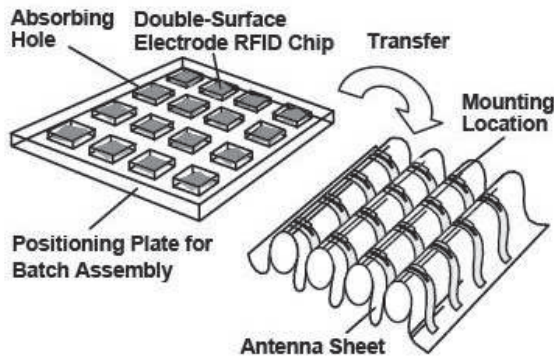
Assembling technology of ultra small RFID chip. The double-electrode chips are suitable for batch assembly [Usa04].
